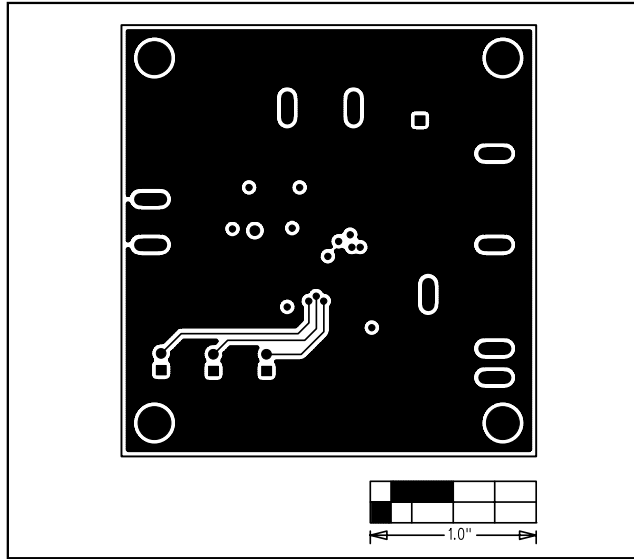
MAX15008 EV Kit PCB Layout—Solder Side (Layer 4)
